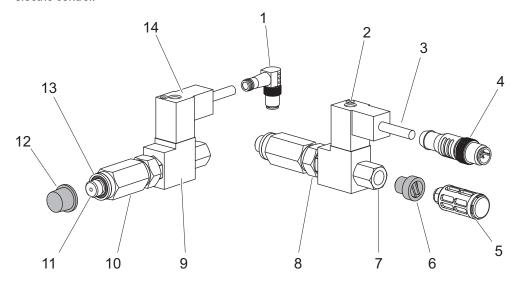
Overview of Pfeiffer Vacuum sealing gas valve
